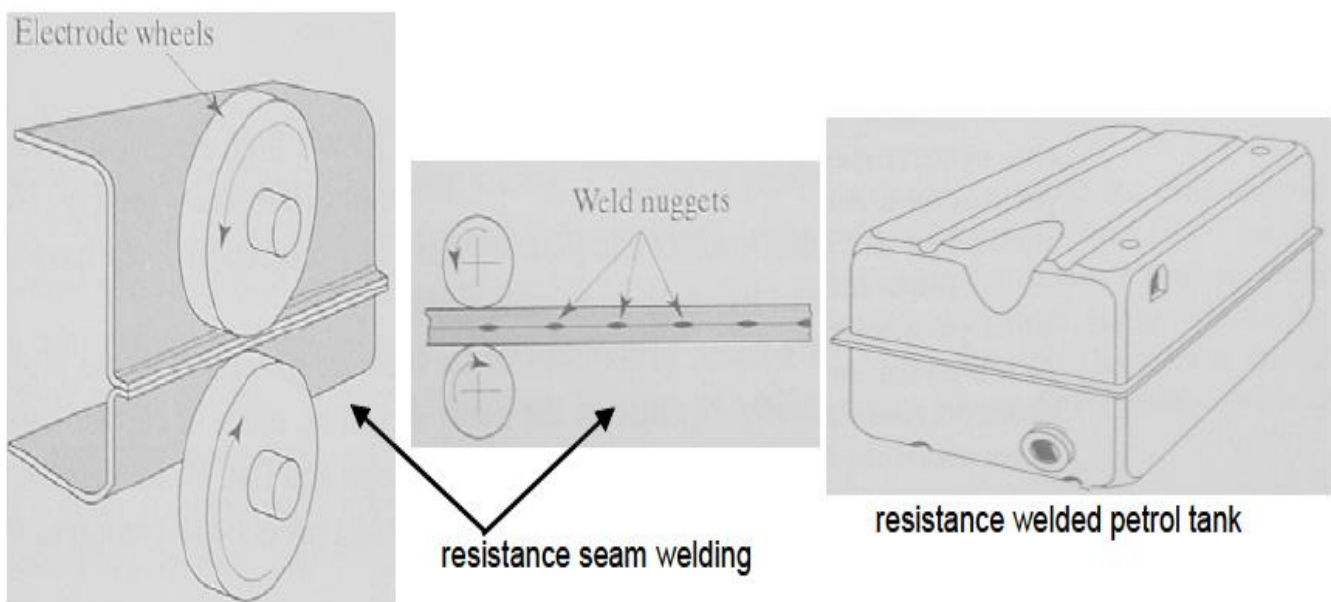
Seam welding (a type of resistance welding)
